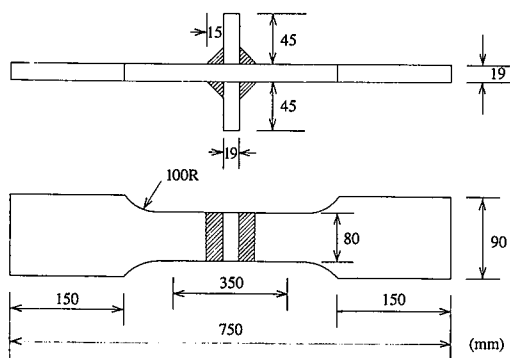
Shape and dimensions of cruciform fillet weld joint
